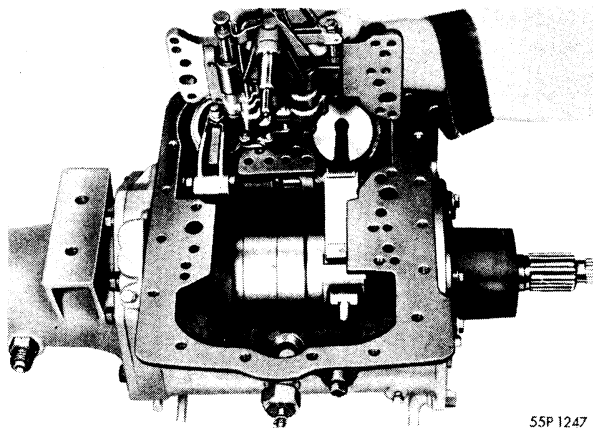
Removing Valve Body and Transfer Plate Assembly (Typical Illustration) (Early Design Valve Body and Transfer Plate Shown)
